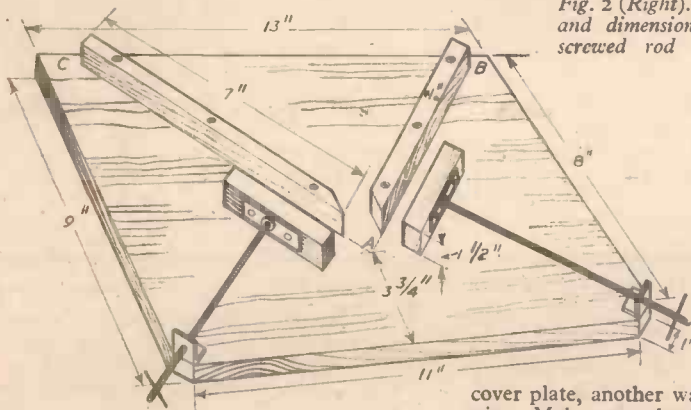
(Right).—Details and dimensions of the screwed rod assembly.
